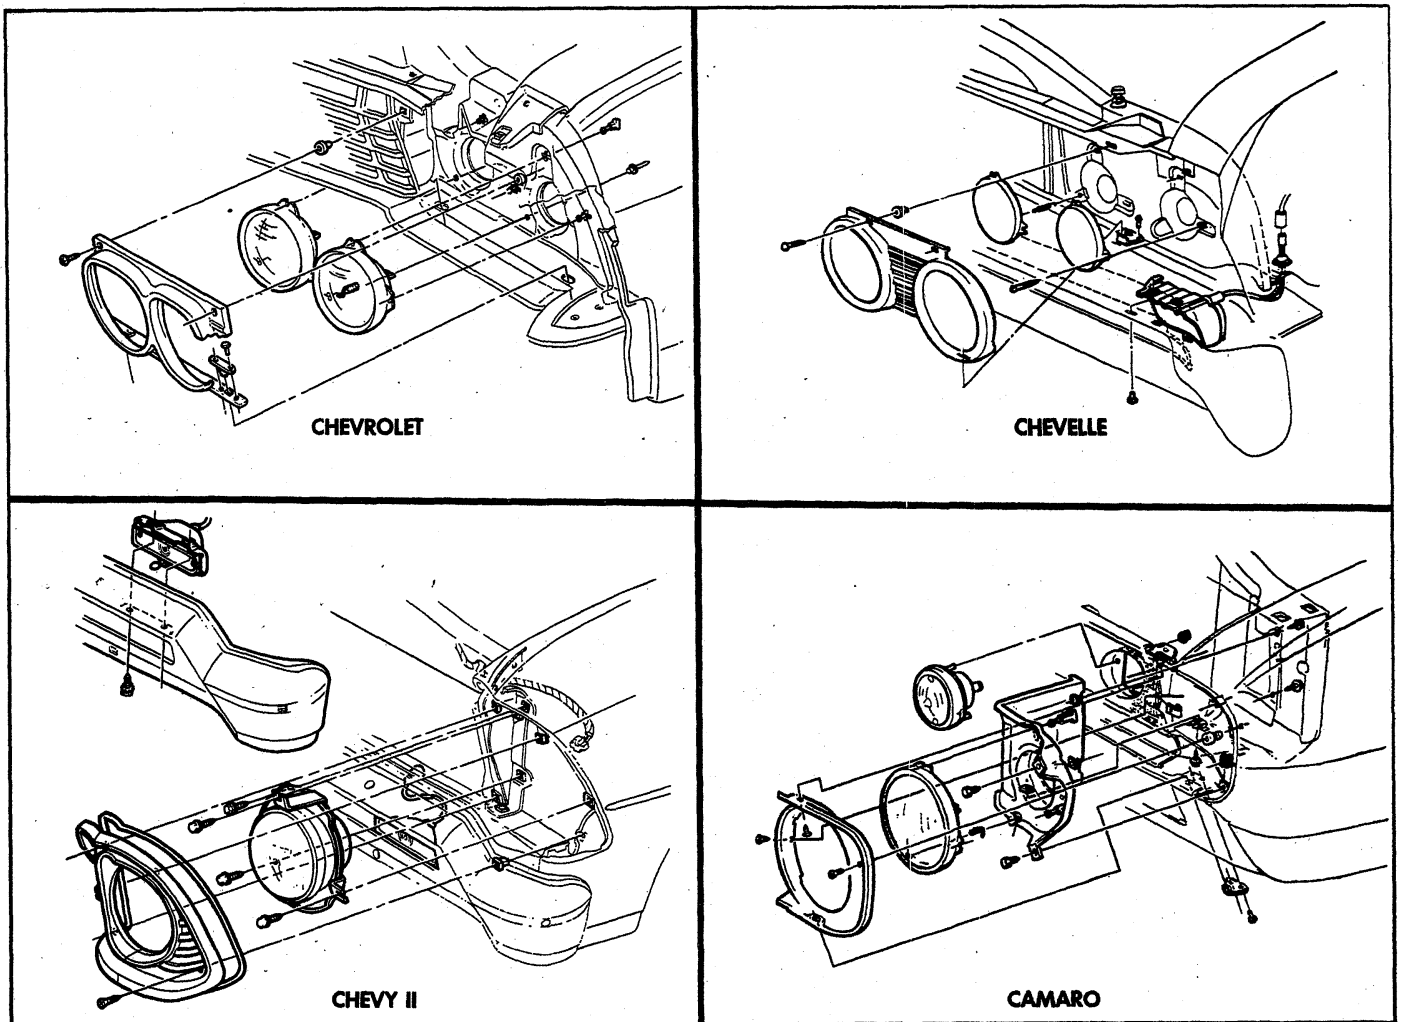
Headlamp Assemblies (Exc. Corvette)
